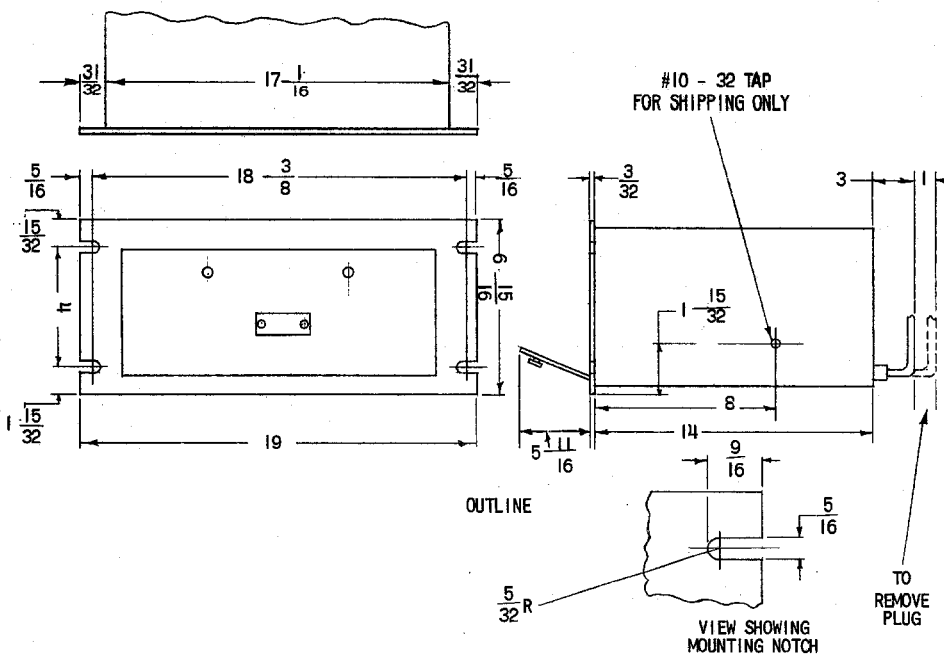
(0227A2037-0) OUTLINE AND MOUNTING DIMENSIONS FOR THE SLS51A
